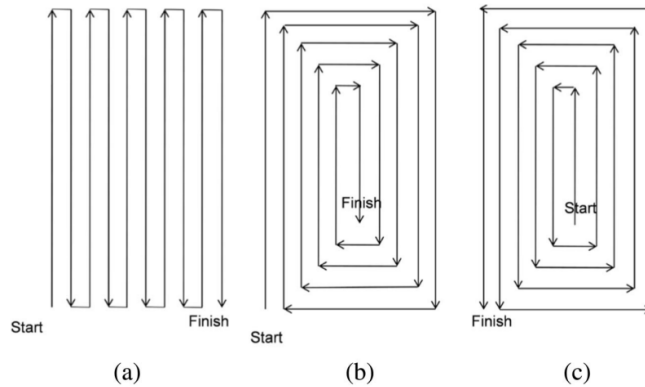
Three types of patterns used in weld-deposition are as follows: a raster, b spiral-in, and c spiral-out [33].
